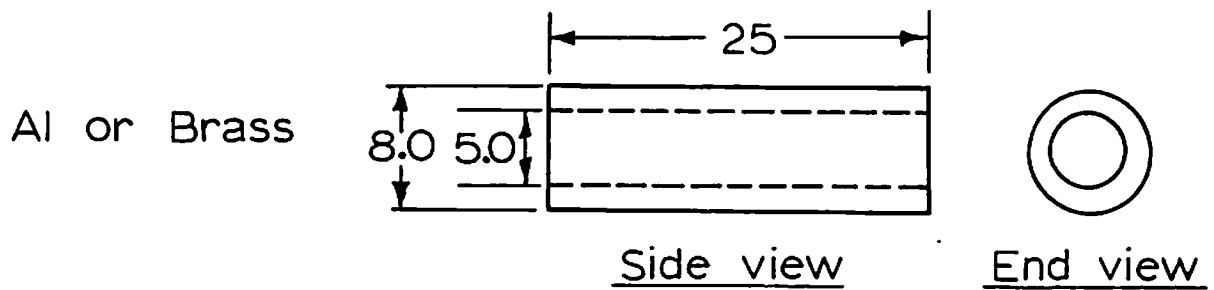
Illuminator coupler tube and spacing sleeve.
